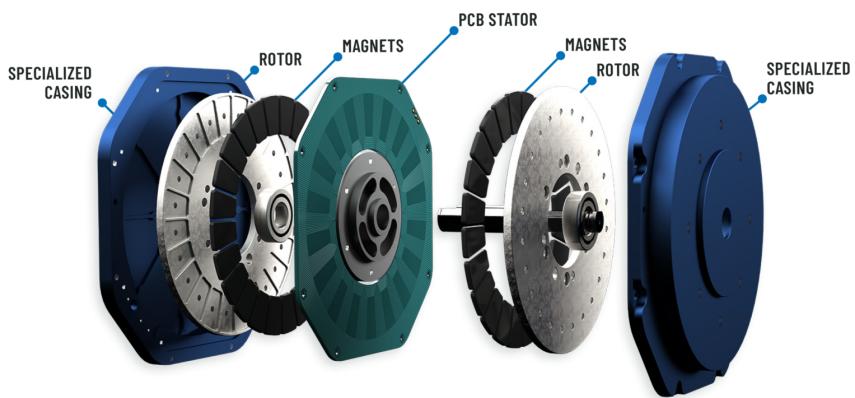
Explosion view of a PCB stator axial motor from PCB Stator [27].
